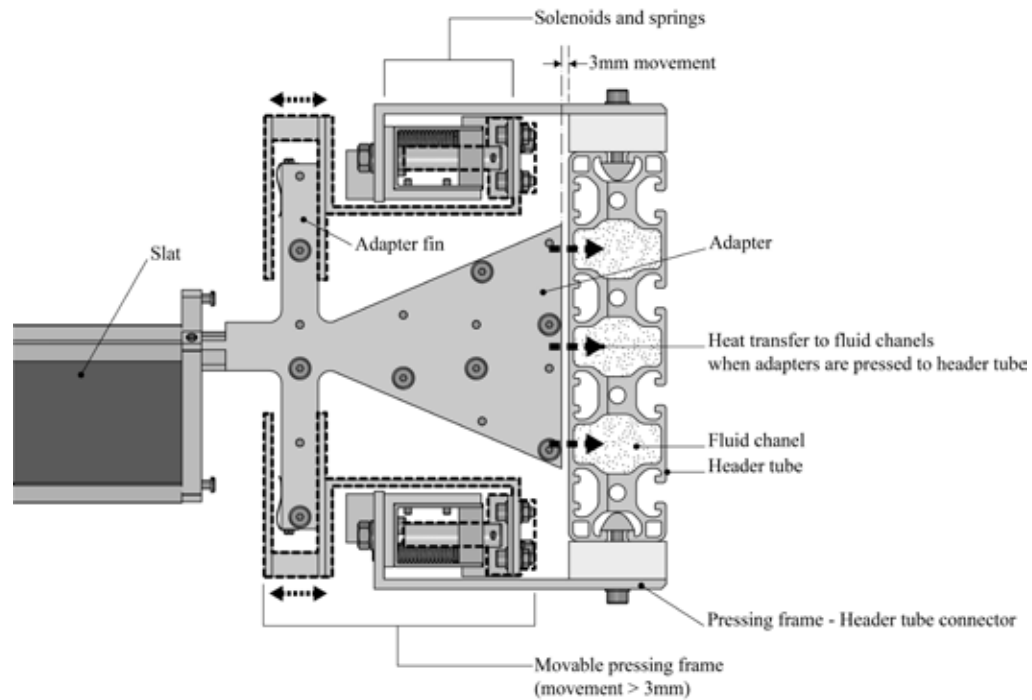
Heat transfer components: Switchable thermal coupling between the slats and the header tube © Fraunhofer ISE and Priedemann Facade-Lab
